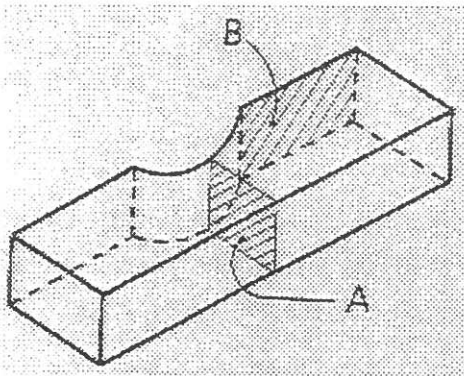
Schematic representation of the clamps for repair. Stress analysis in sections A and B used to derive the loading on the clamp for design of the fillet weld connections.
